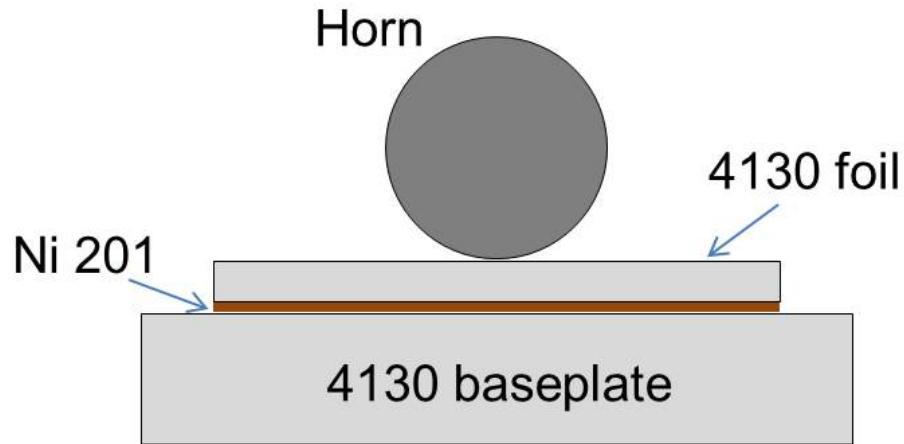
Weld schematic for joining steel to steel using Ni interlayer.
